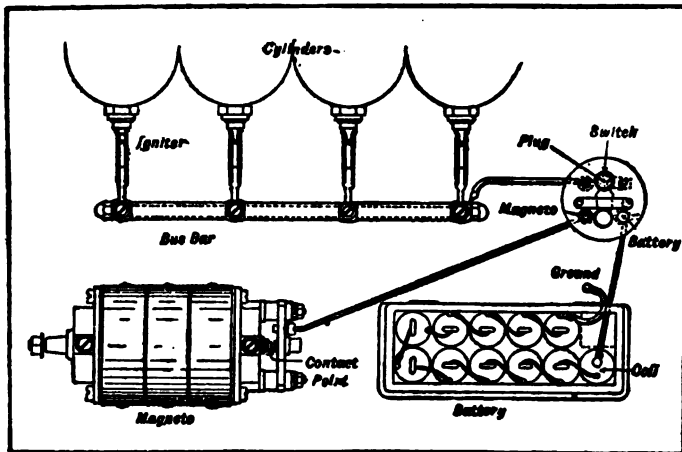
Typical four-cylinder, low-tension ignition system.
